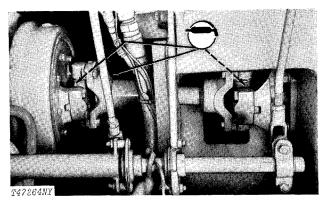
Axle Drive Shaft Universal Joints (3 points)
